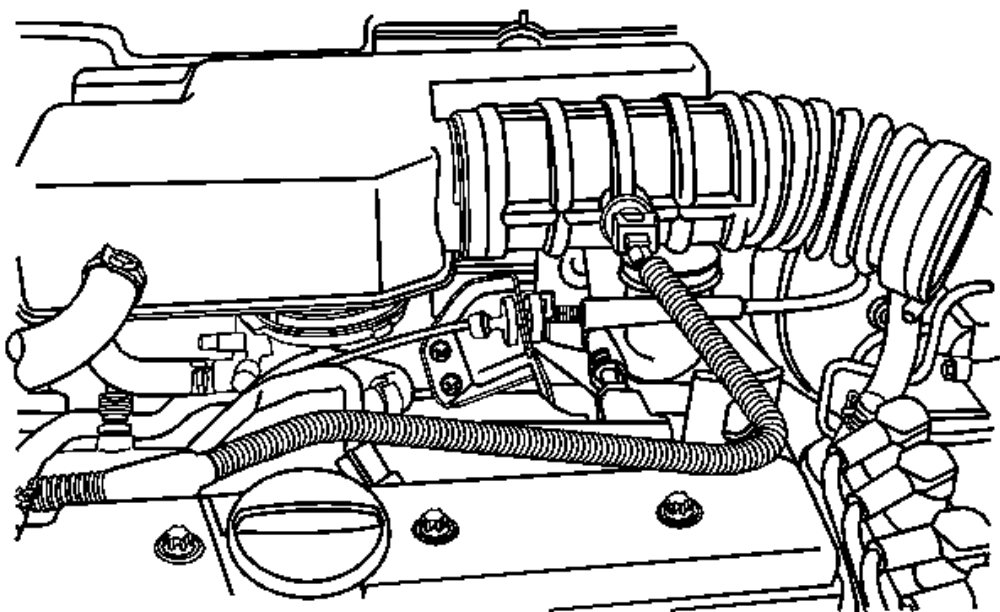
View Of Manifold Air Temperature Sensor And Throttle Body Intake Tube
